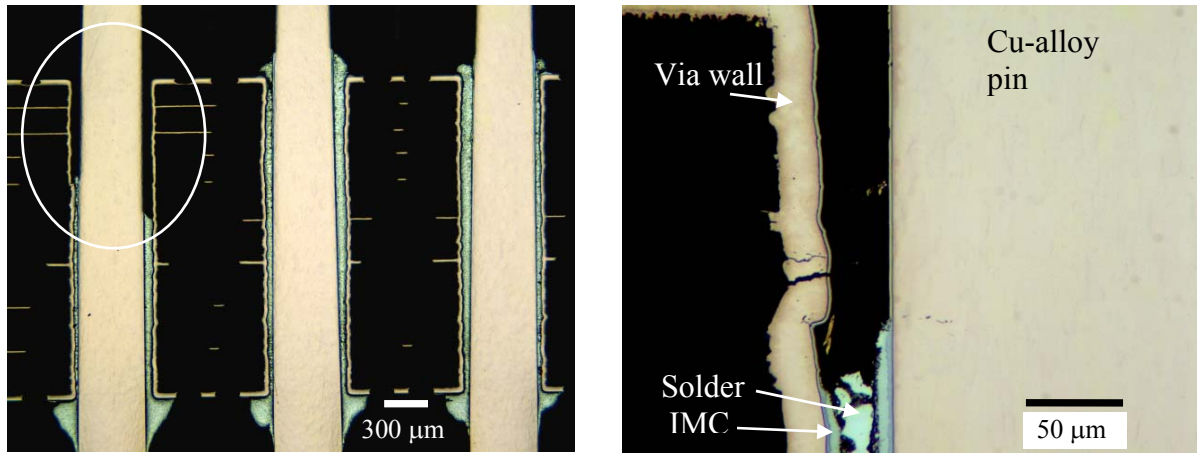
a) Low magnification optical micrograph of three connector pins showing a partially filled through hole solder joint. b) Via cracks in a partially filled solder joint after 500 thermal cycles.
